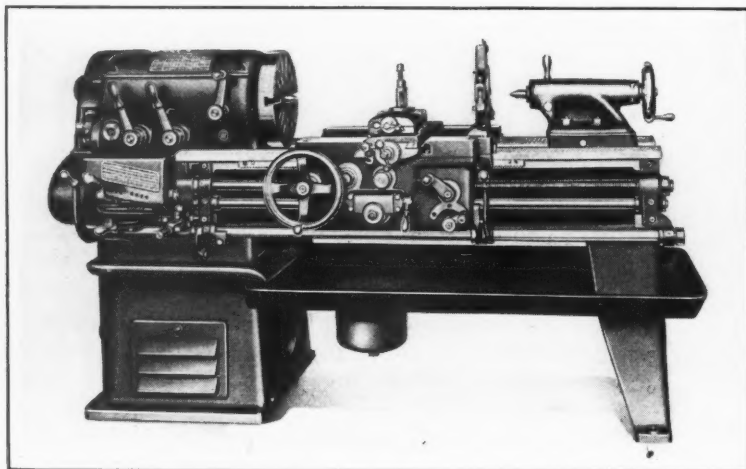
Reed-Prentice Engine Lathe with Selective-speed Geared Head
